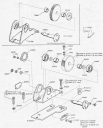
EXPLODED VIEW OF THE MECHANICAL ASSEMBLY AND COMPONENTS
